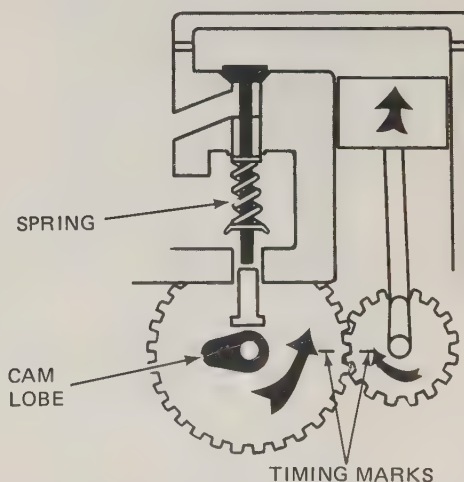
Further rotation of the crankshaft and camshaft moves the lobe out from under the valve tappet, and this allows the spring to pull the valve down and reseal it.
